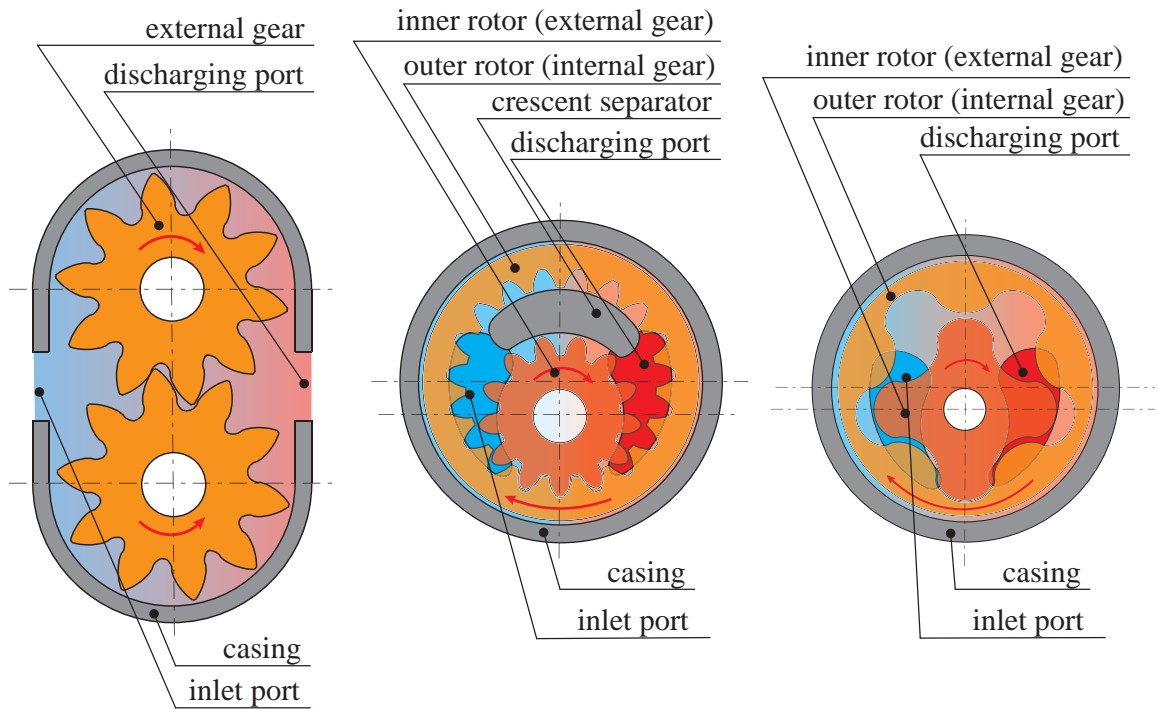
Three types of gear pumps. External gear pumps (left) are the most common type of gear pumps. They consist of two external spur gears. The fluid is captured between the tooth and the sidewall. While they have a simpler structure and higher discharging pressure, they tend to have larger outer size compared to the two following other types. Internal gear pumps (middle) have a pair of an external and internal spur gear. The fluid is captured between the teeth and a crescent separator. They have smaller outer size than external gear pumps, while they need high machining accuracy. Trochoid pumps (right) have trochoid gears and the internal gear (outer rotor) has exactly one more teeth than the external gear (inner rotor). This configuration can trap the fluid and convey them without help of the crescent separator.
